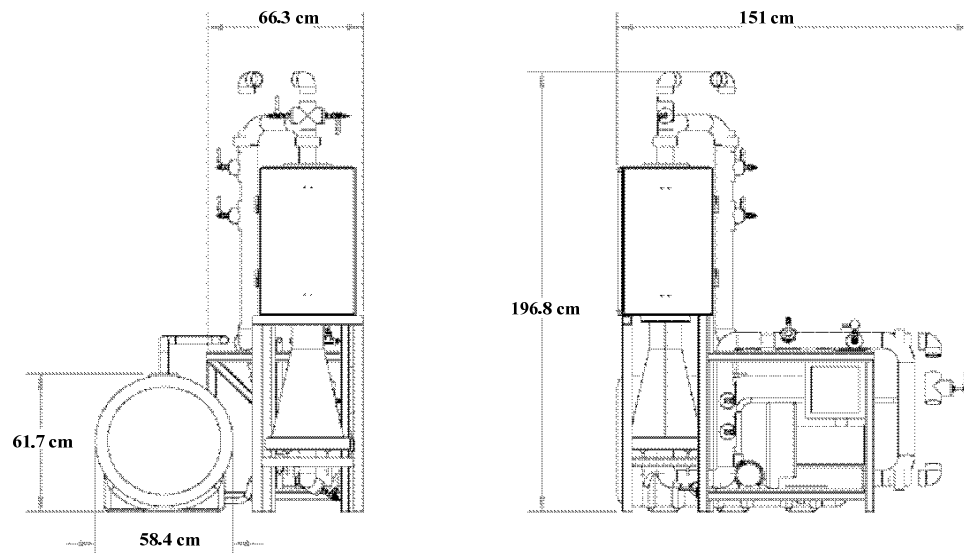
Detailed drawing of the Photo-CREC-Air Reactor dimensions.
